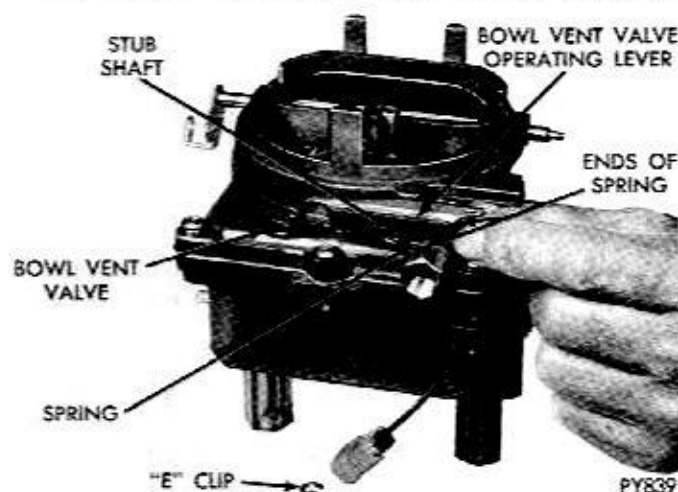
Removing or Installing Bowl Vent Valve Operating Lever
